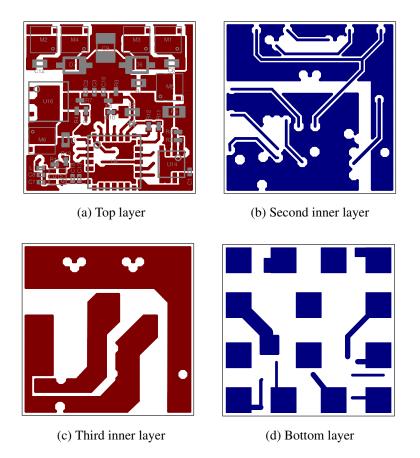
Four layer layout, top view, of the miniaturized wireless power receiver
